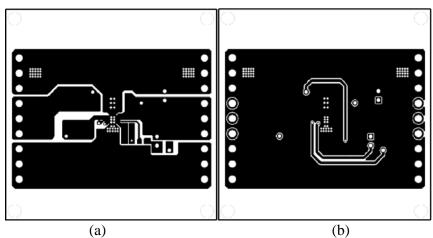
PCB Layout Plots: (a) top layer, (b) bottom layer
